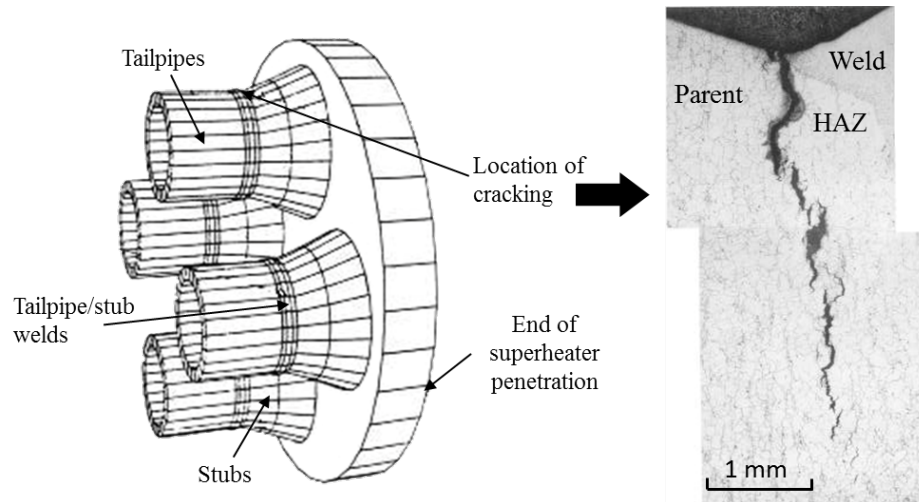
Cracking in superheater tailpipe weld type 316H [10].
